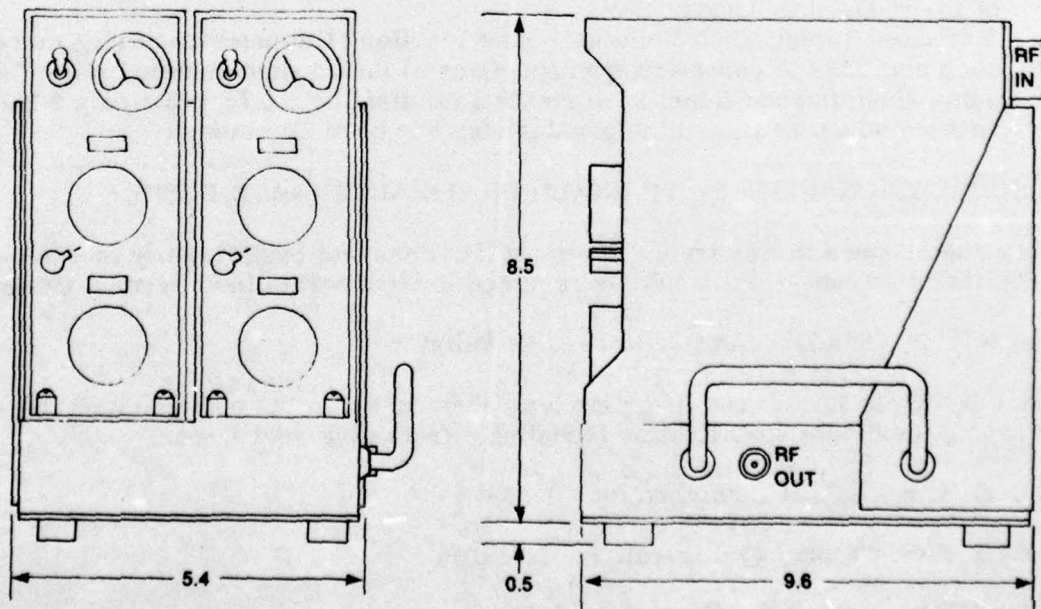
Outline Drawing, 2-Channel Multicoupler (Alternate Design).
